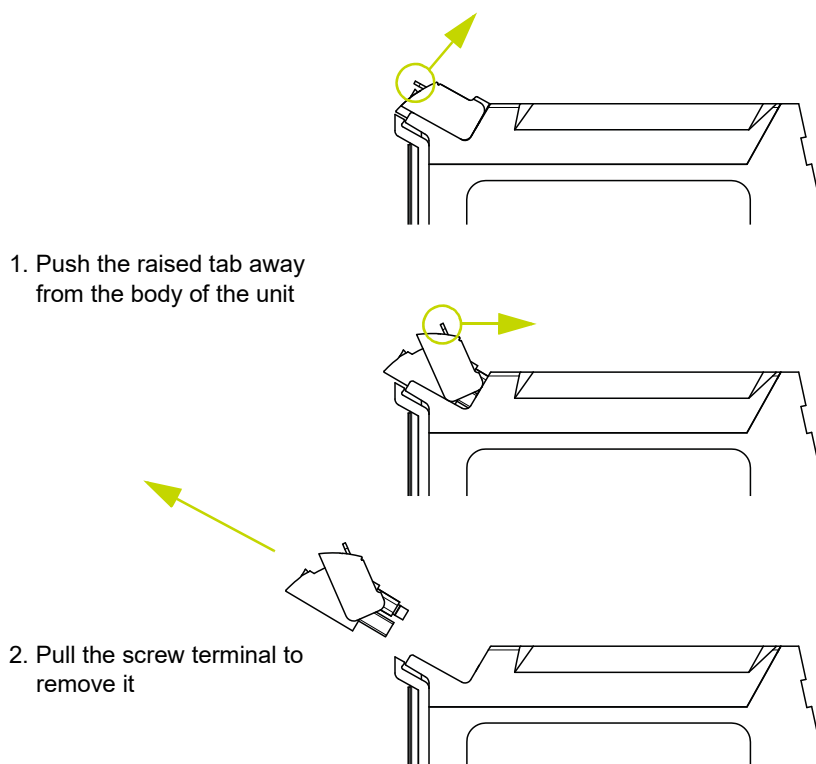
Removing a screw-terminal connector from the main body of a GSI127 unit
